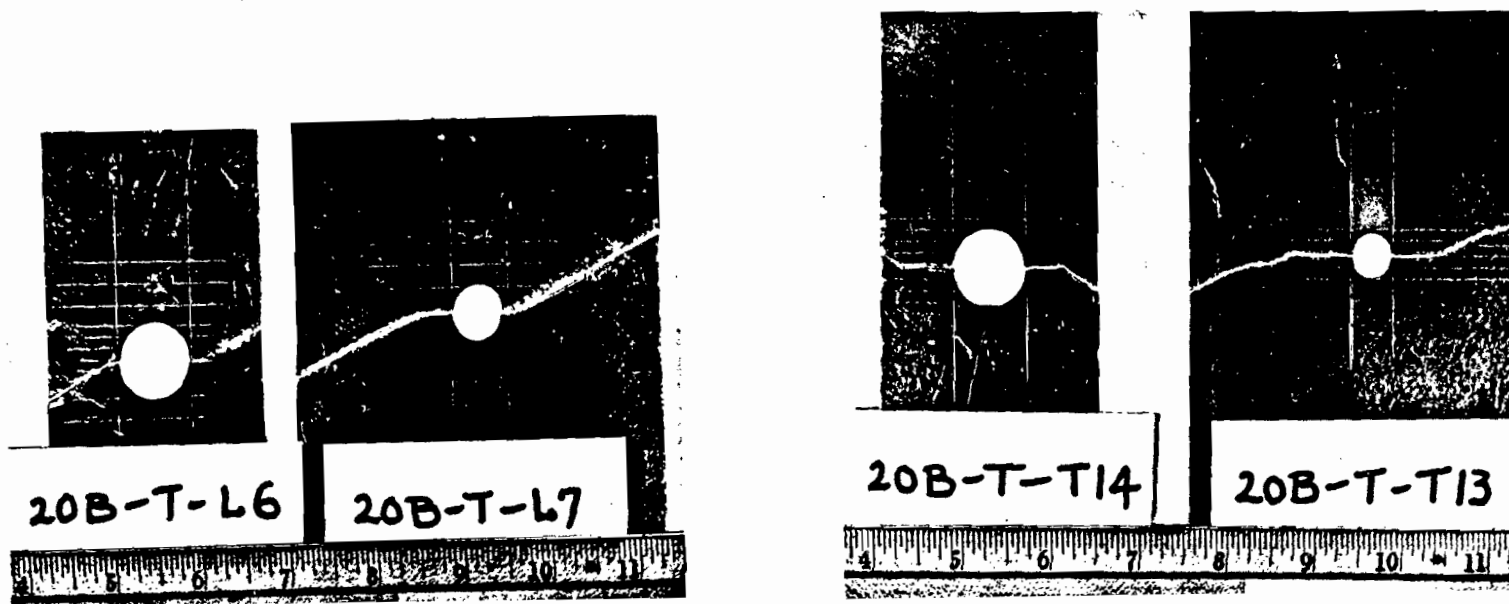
Rectangular Plate Specimens After Fracture (B Steel)
